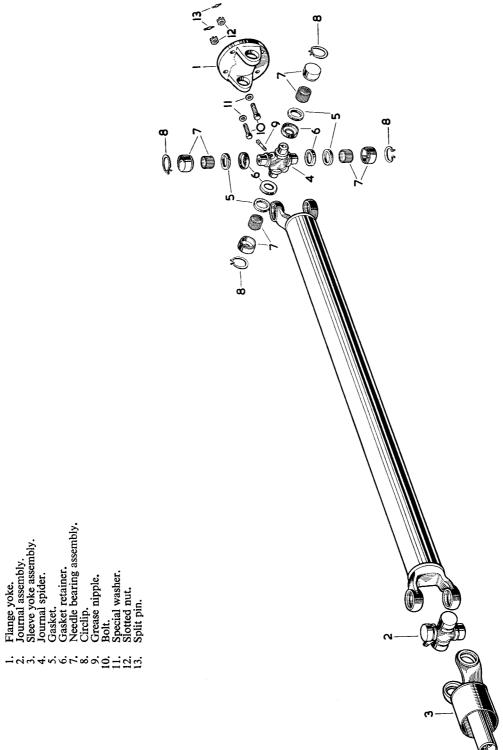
Exploded view of propeller shaft assembly (Standard trans-mission propeller shaft illustrated).
